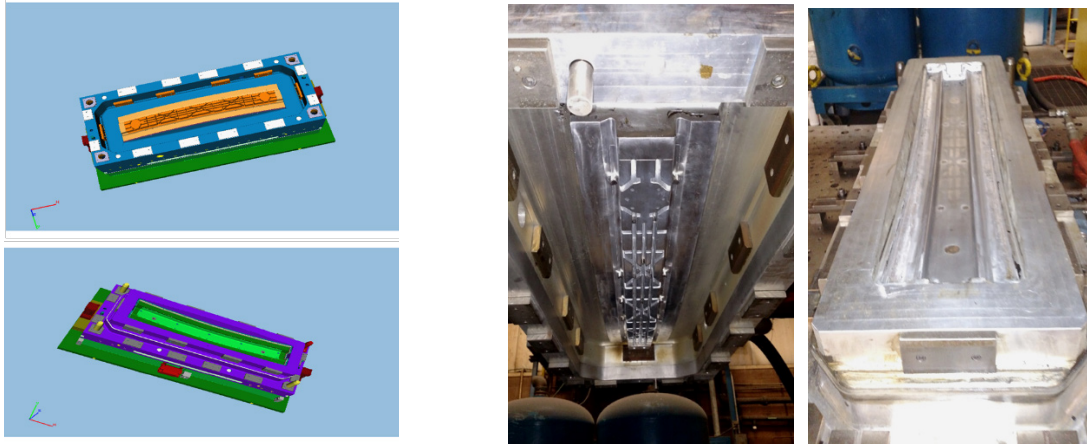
The CAD for the beam tooling upper and lower molds (left), and pictures of the machined upper and lower beam tooling (right).
